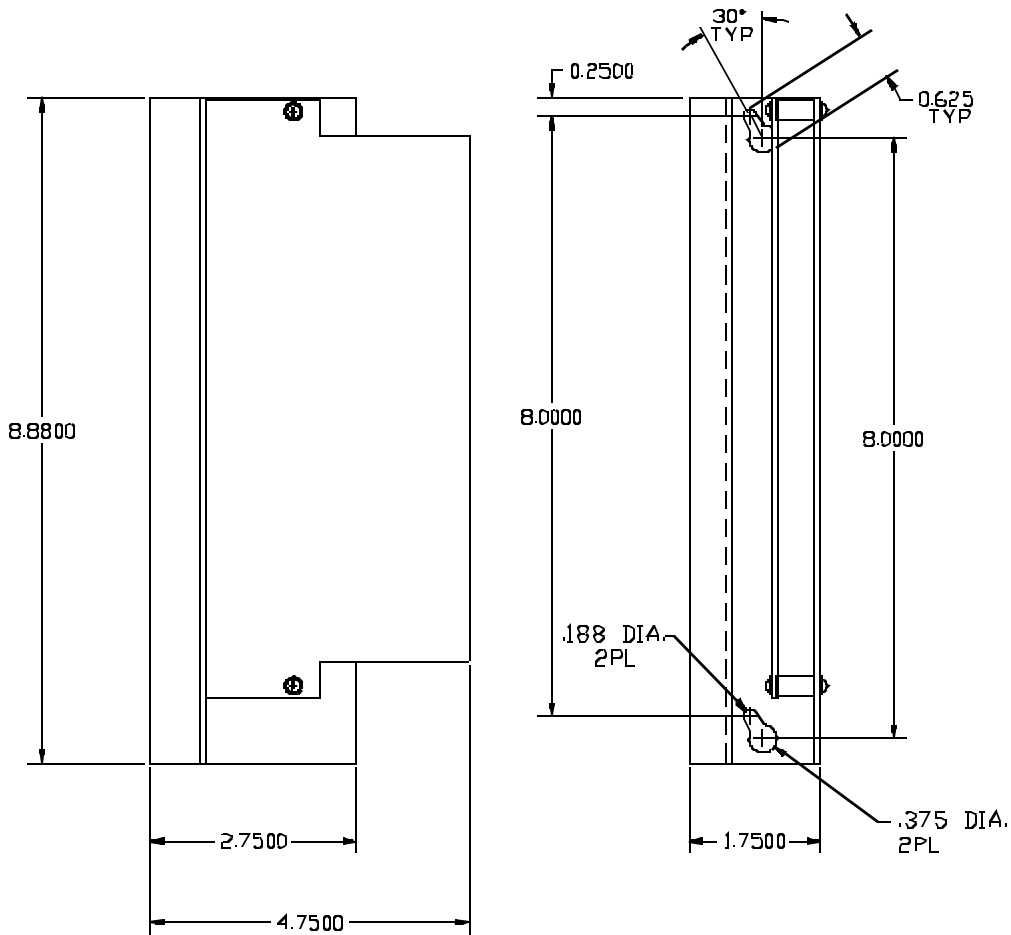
CONTROLLER MOUNTING DIMENSIONS, MODELS 2235 AND 2236
